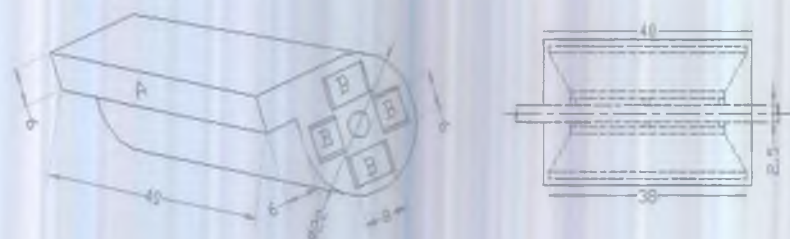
Fan housing and fan blade; A is outlet opening and B is inlet opening (all dimensions are in cm).
